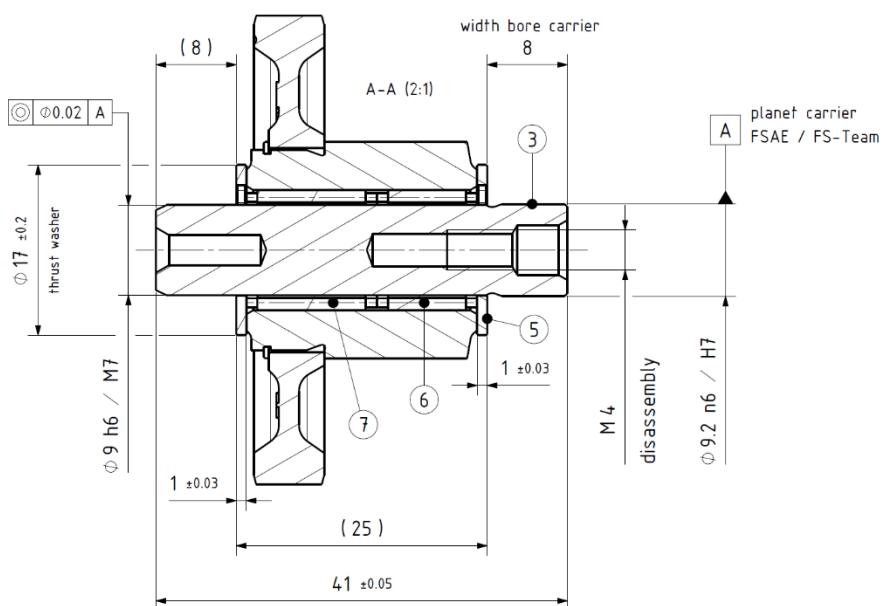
Excerpt from technical drawing "Subassembly Planet"
